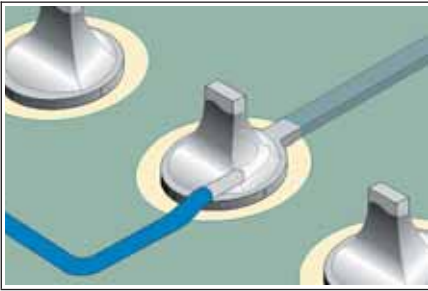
Acceptable Wire wrapped around component lead on solder side.
